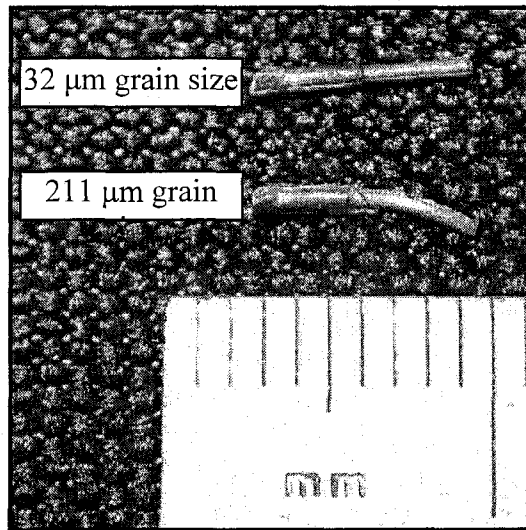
Samples of pins extruded using the $\text{Ø}0.76:0.57$ mm die and workpieces having a grain size of 32 μm or 211 μm .
